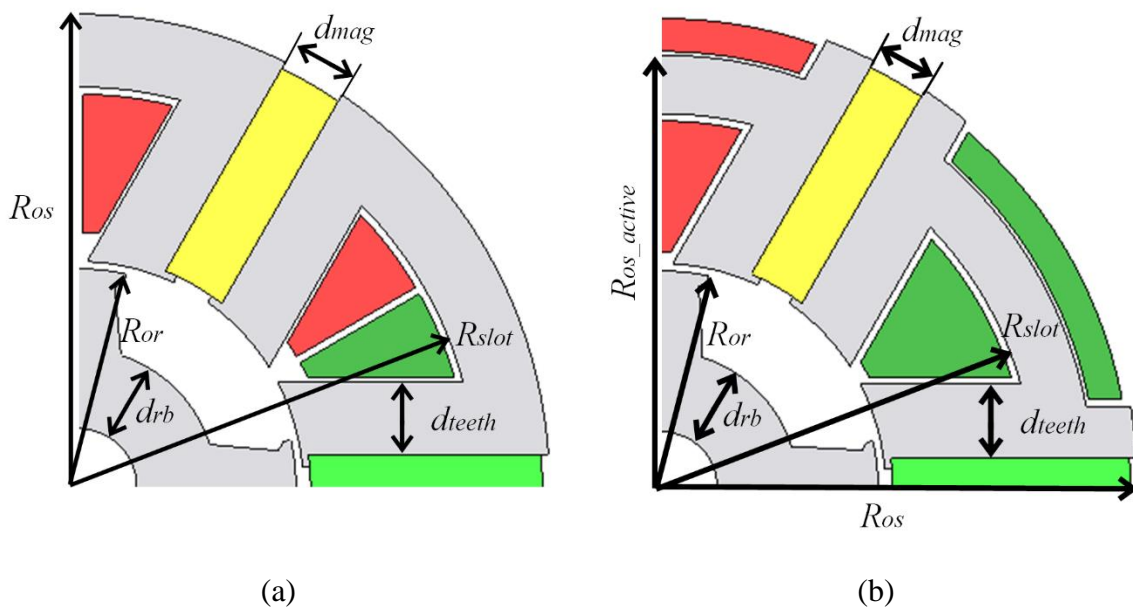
Section view and geometry parameters of the dual-stator 6/4 FSPM machine
